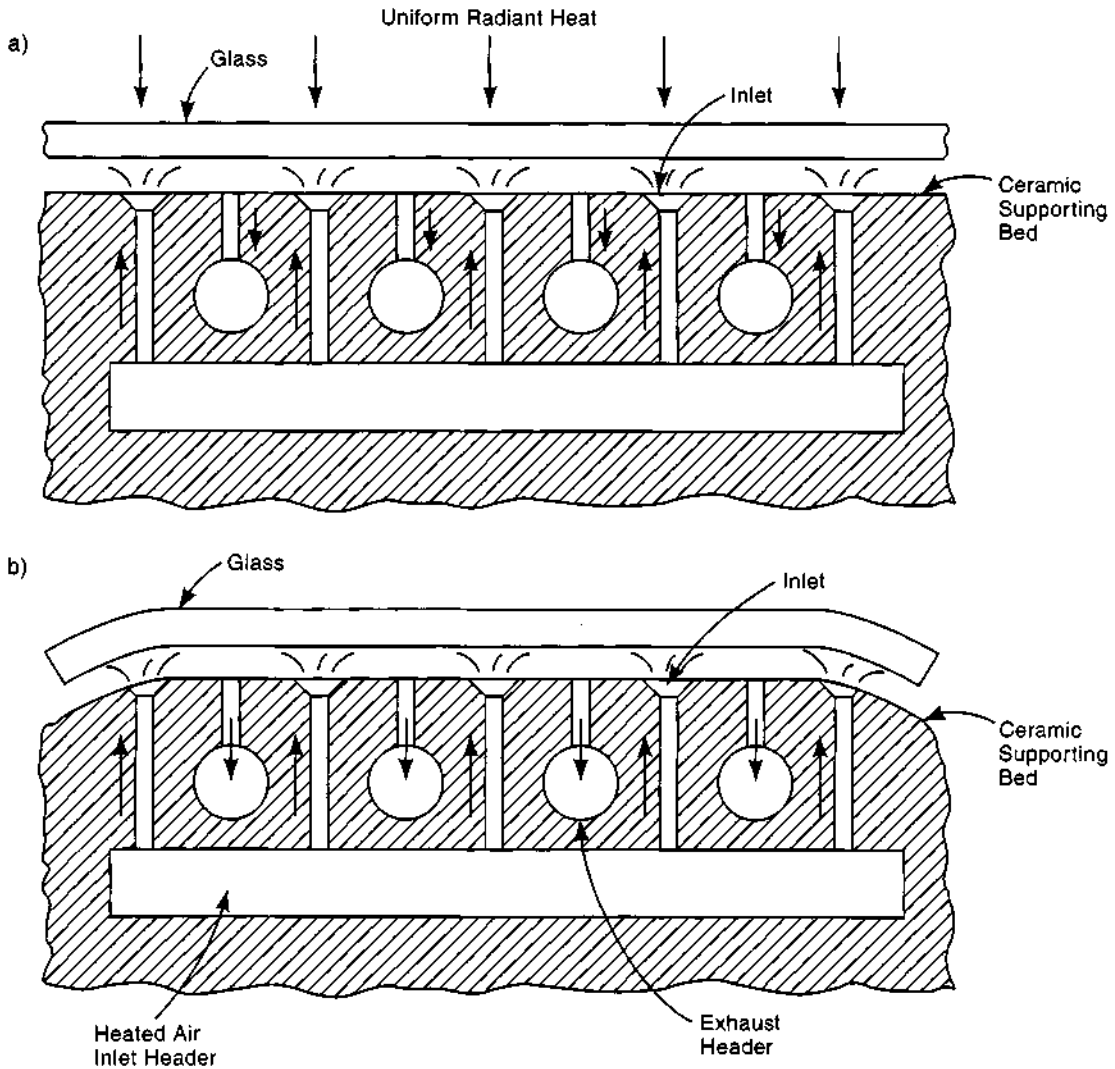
A5a Cross-sectional view of air float bending and tempering of sheet glass. a) heating section. The glass sheet floats above a ceramic bed on streams of hot air. The sheet is heated as it slides on the air cushion (guided by drive wheels) to the forming section. b) At the forming section, the shape of the supporting bed is changed and the glass sheet sags and bends. The sheet then continues to slide to a tempering or annealing section.
